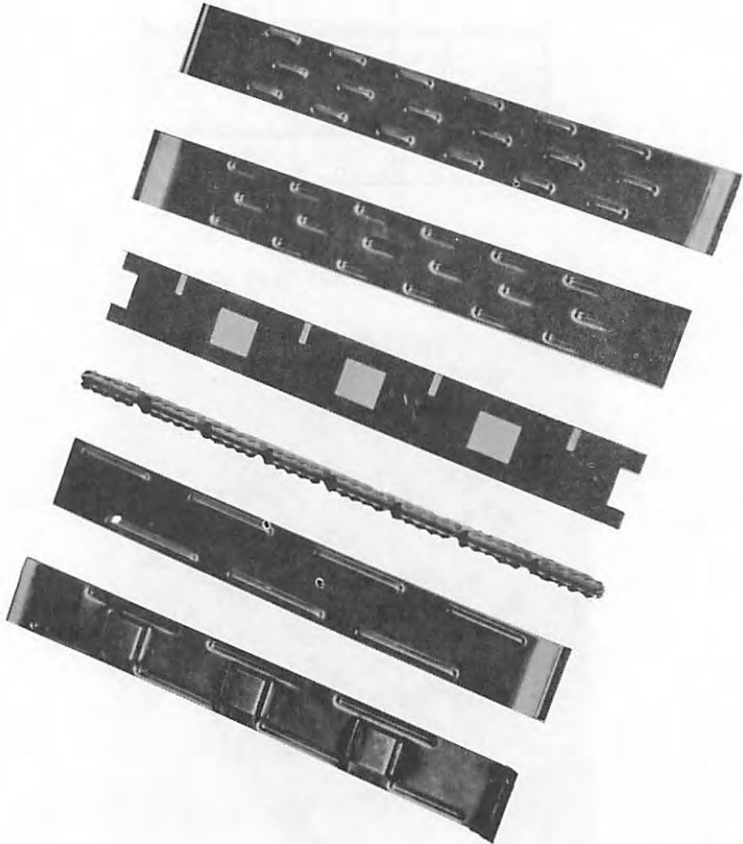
Components of the spacer grill Electron Beam welded type.
